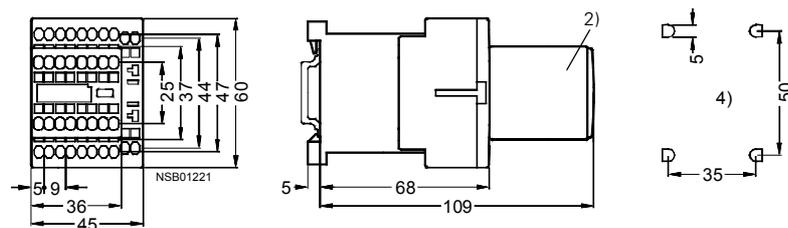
3RT10 1 contactors (Cage Clamp-connection) with auxiliary contact block
